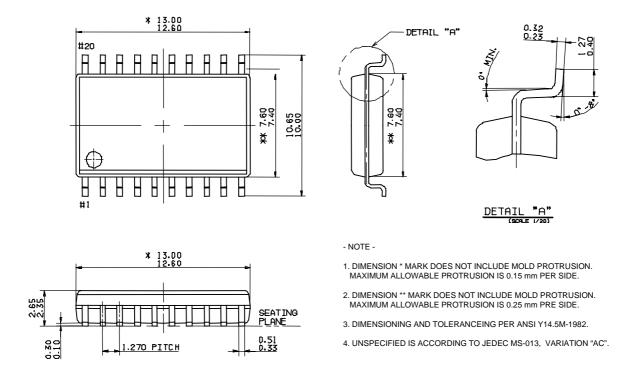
20SOP (300MIL) Pin Dimension (UNIT: mm)
